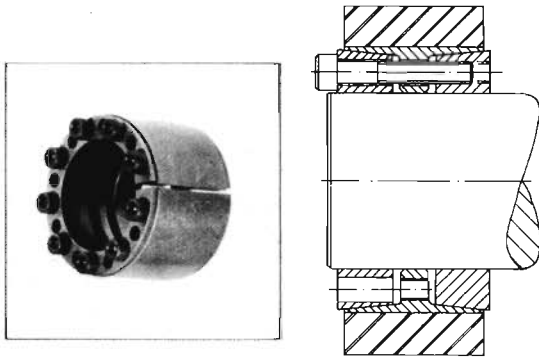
SCHEMATIC OF LOCKING MECHANISM
